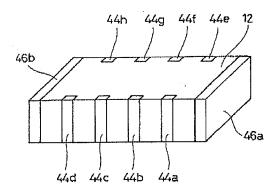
It is the sectional-drawing solution view showing the laminating 3 terminal capacitor array which has improved the cross talk of a laminating 3 terminal capacitor array shown in drawing 11.
